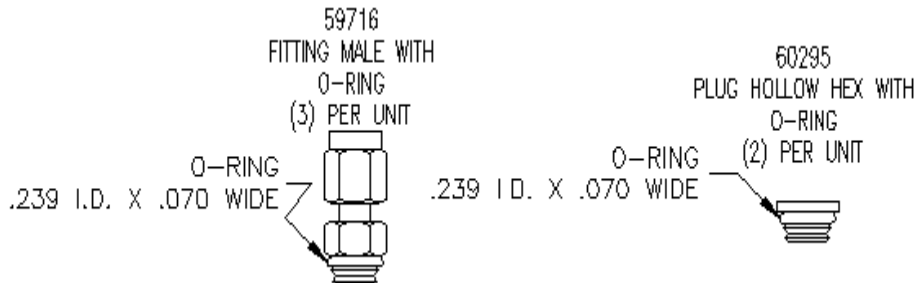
Additional ORION-2C O-ring Replacement Parts
